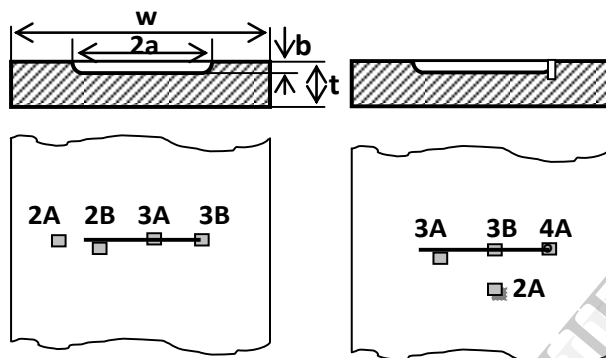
Specimens (1 - left, 2 - right) with surface microcracks having crack-tip opening displacement 3 and 5 μm respectively. The crack in the specimen 2 had drilled closed hole in the tip with 1 mm diameter and 2 mm depth. Crack parameters are shown in the right top picture. The strain gages locations on both surfaces are shown in the lower pictures
